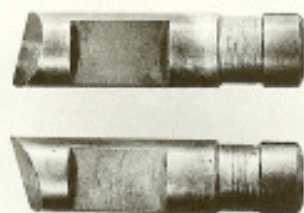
Rear brake adjuster unit plungers. They really are right and left handed. The notches fit locating pegs machined on the two bolts holding the adjuster to the backplate. Figure 14: Rear brake adjuster unit. If handed plungers are interchanged, the shoes will not contract enough to allow the drum to be refitted. When assembled correctly, turning the adjusting screw will produce an audible click.
